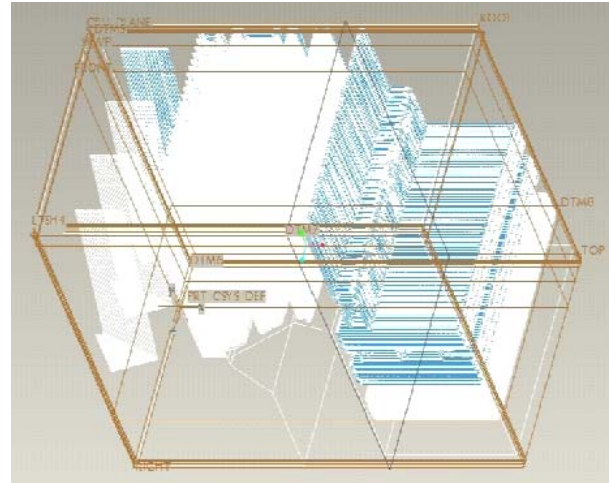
3D view of the boiler model. Boiler geometry showing all pressure parts.
